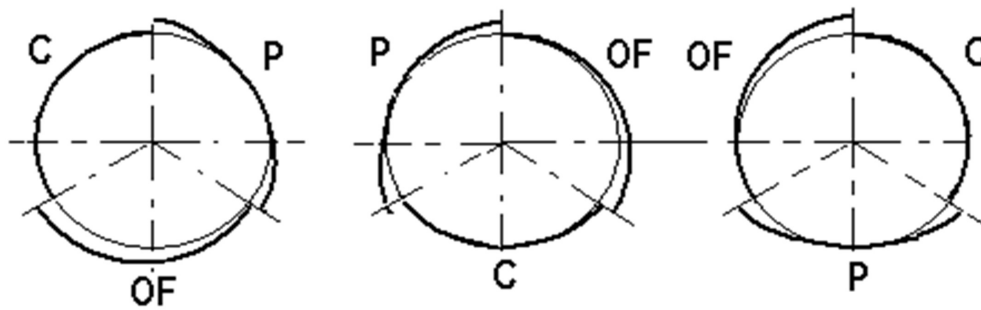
3-lobe journal bearings with the lobes of different geometry
